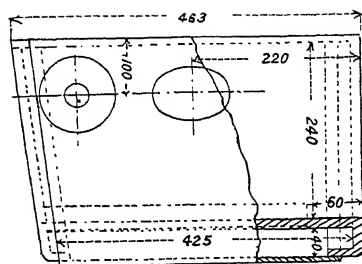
Longitudinal Section, first section Spout. (Dimensions in millimetres.)
